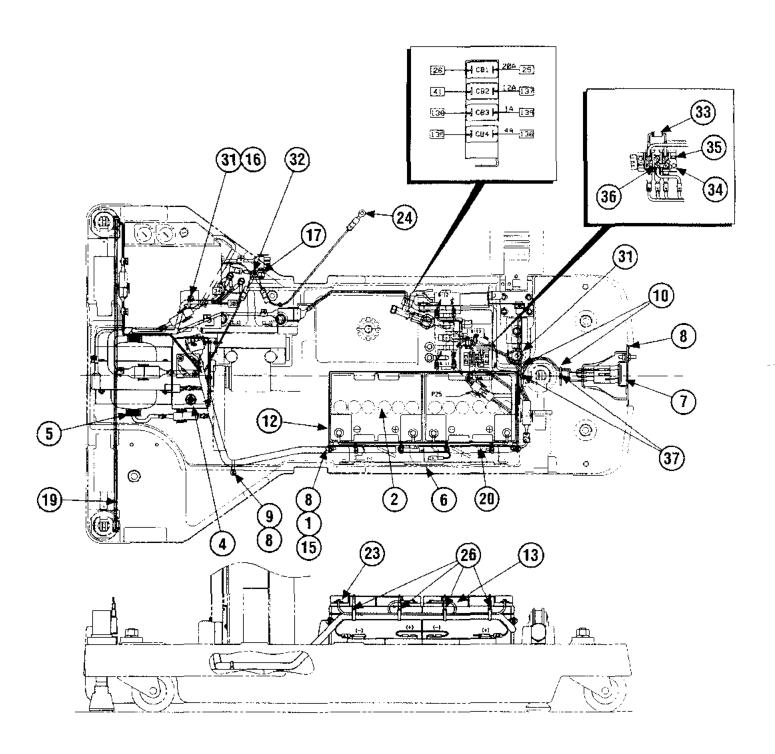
A. Table Base and Column: Electrical Assembly (Part 1 of 2)
